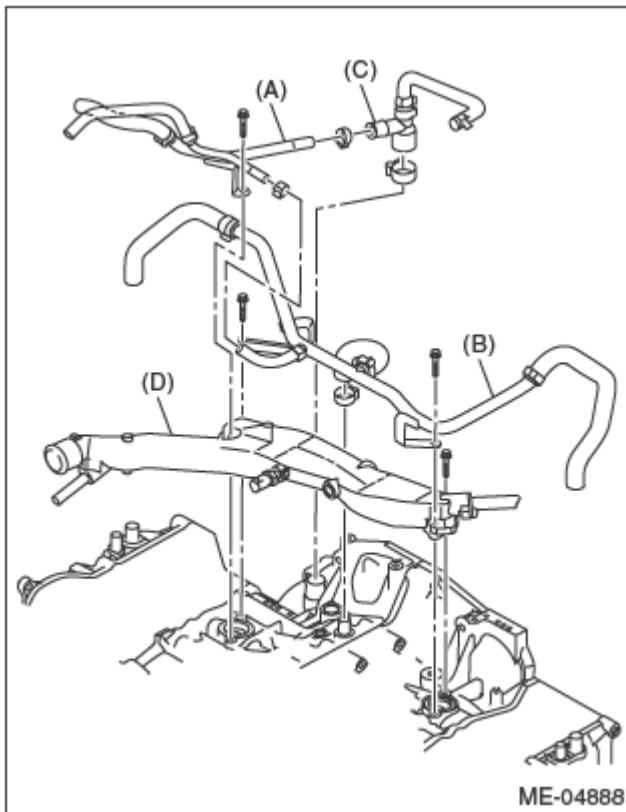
Identifying Blow-By Pipe Assembly (A), Blow-By Pipe (B), PCV Hose Assembly (C) And Water Pipe Assembly (D)
